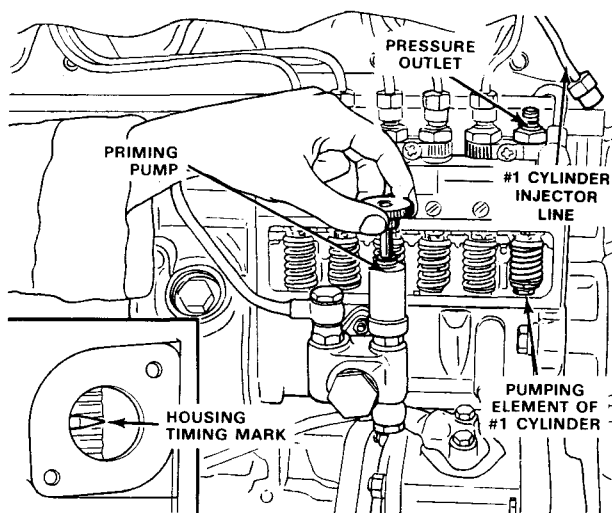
Checking Pump/Engine Timing Using the "Spill Method" (SSD-655)
